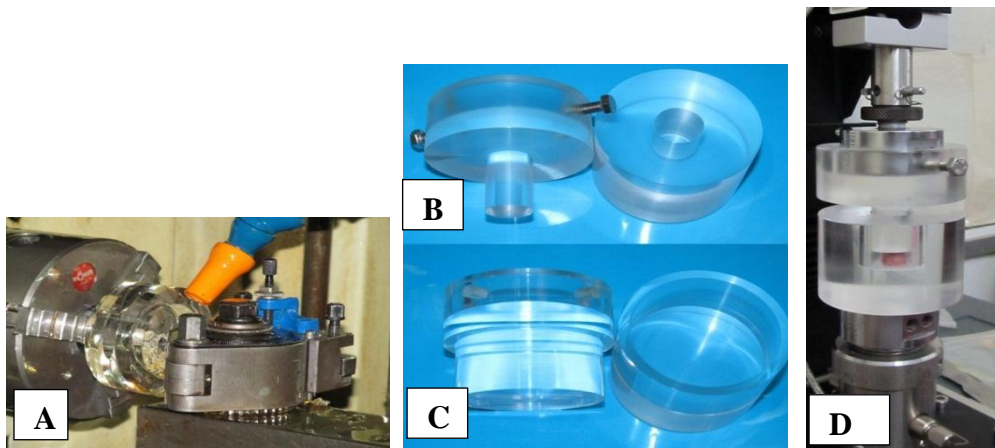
4: Fabrication of acrylic mold (A), Acrylic mold for small and big animals (B, C), Installation of acrylic mold in the INSTRON machine (D).
